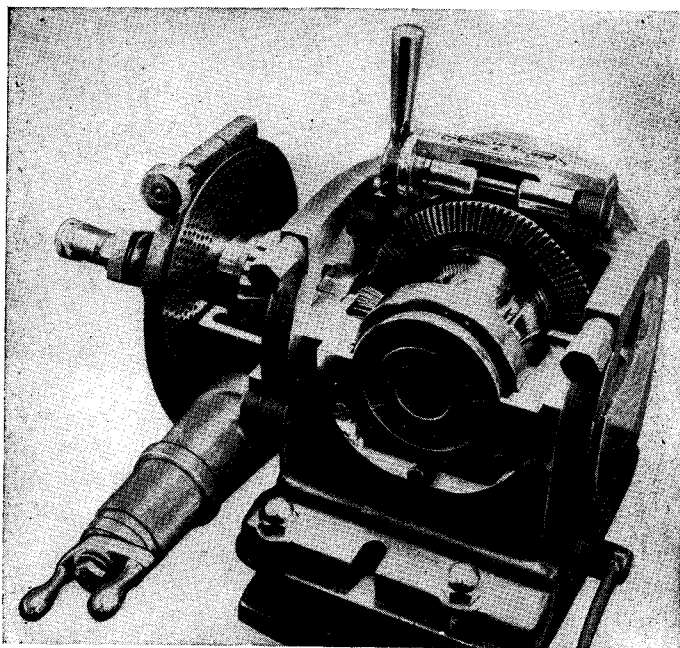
The Kearney and Trecker (Milwaukee) Model K dividing head showing the hypoid bevel gearing, 5 to 1 ratio. (The Kearney and Trecker Corporation)
